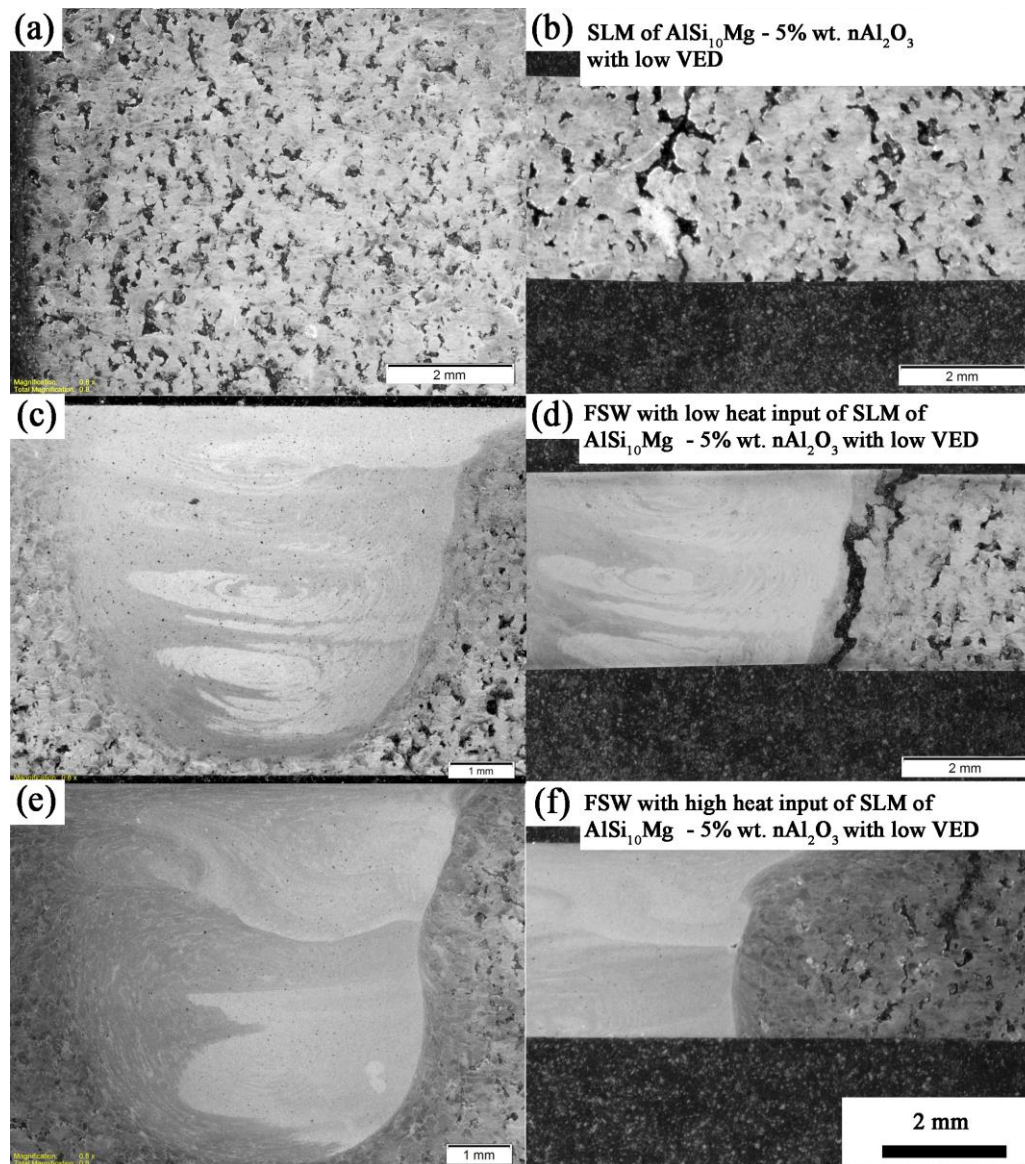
Cross-sectional view of the samples before (left) and after the tensile test (right).
